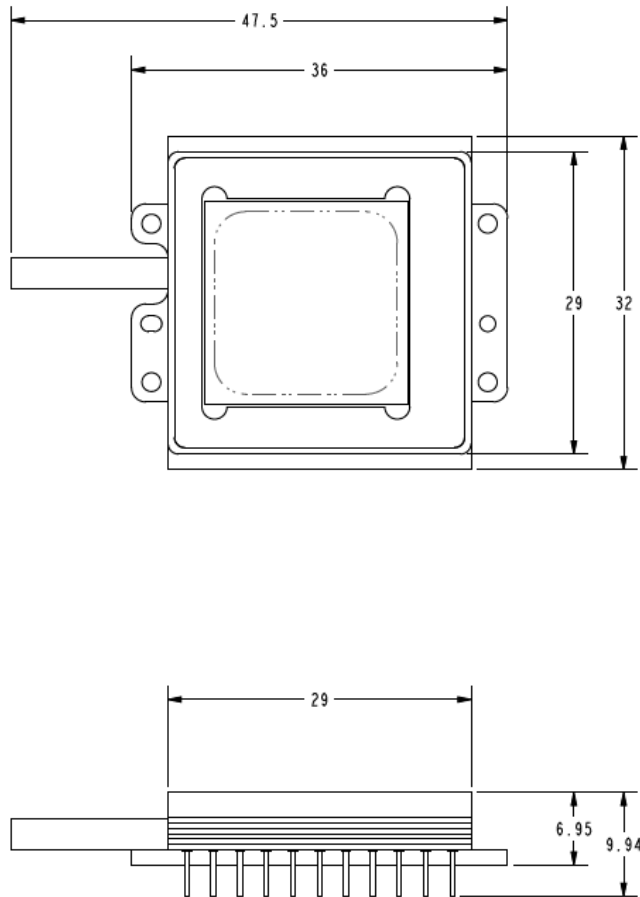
Metallic package with ceramic inserts design, dimensions are in millimeters
